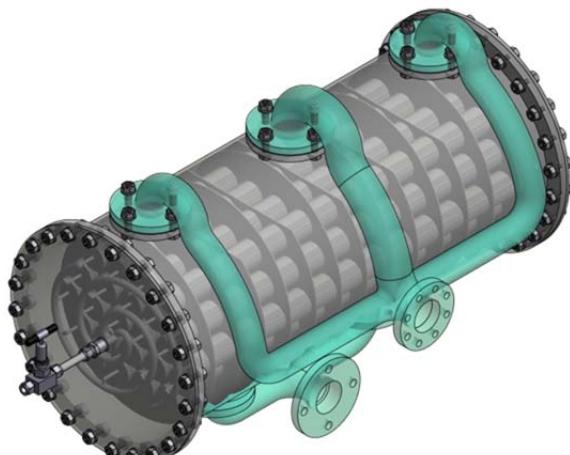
Multimodule tank design draft from HZG. Pressurised single tank modules (designed for 650°C and 100 bar) with welded ends. Outer hull contains heat transfer medium only and is designed for 650°C and 0.5 bar overpressure, closed by flanged ends for easy mounting of the single modules. Vertical plates guide the heat transfer medium around single tank modules.
